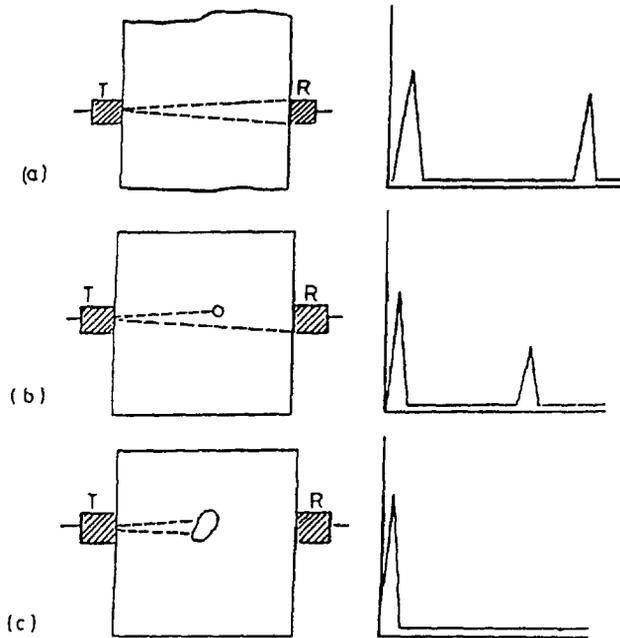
(a) Defect free specimen, (b) Specimen with a small defect, (c) Specimen with a large defect.
